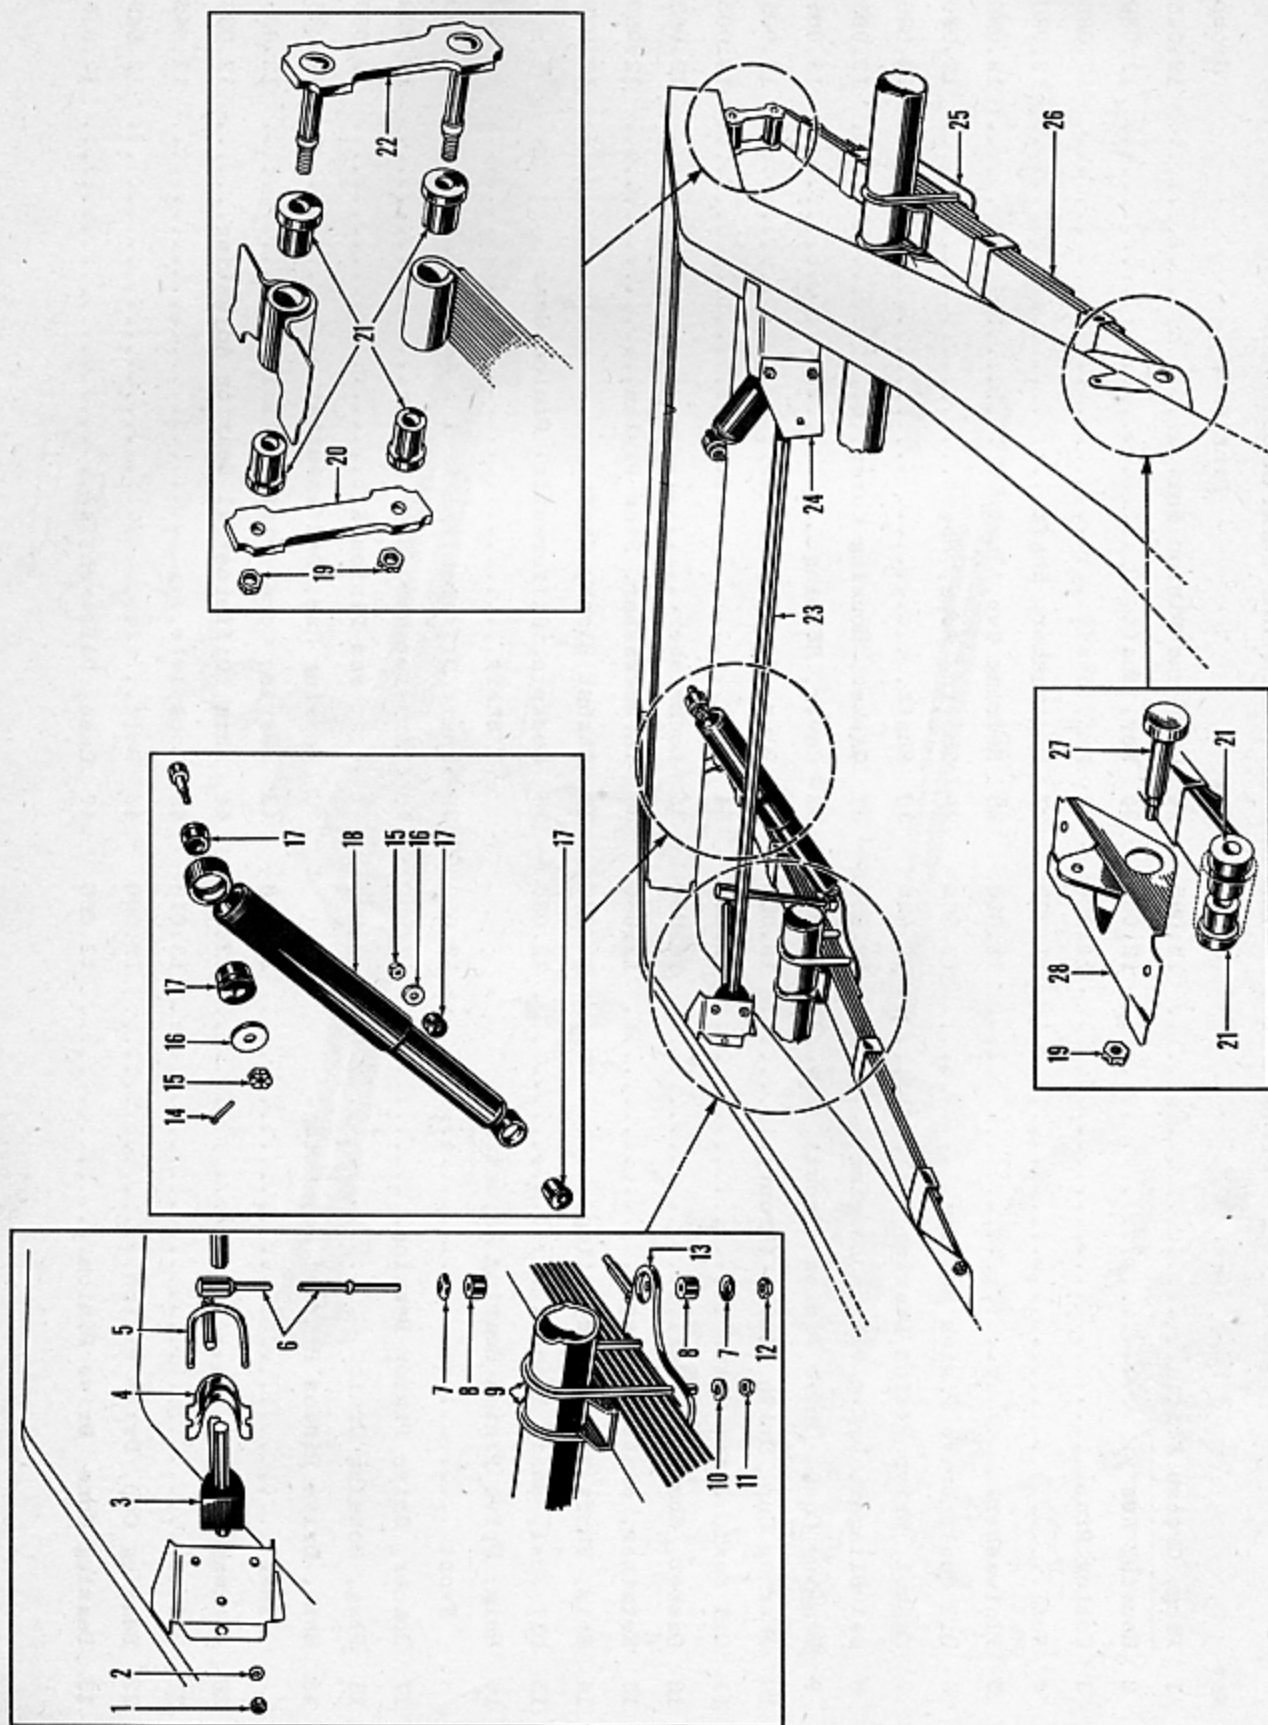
TYPICAL REAR SUSPENSION - EXPLODED VIEW
